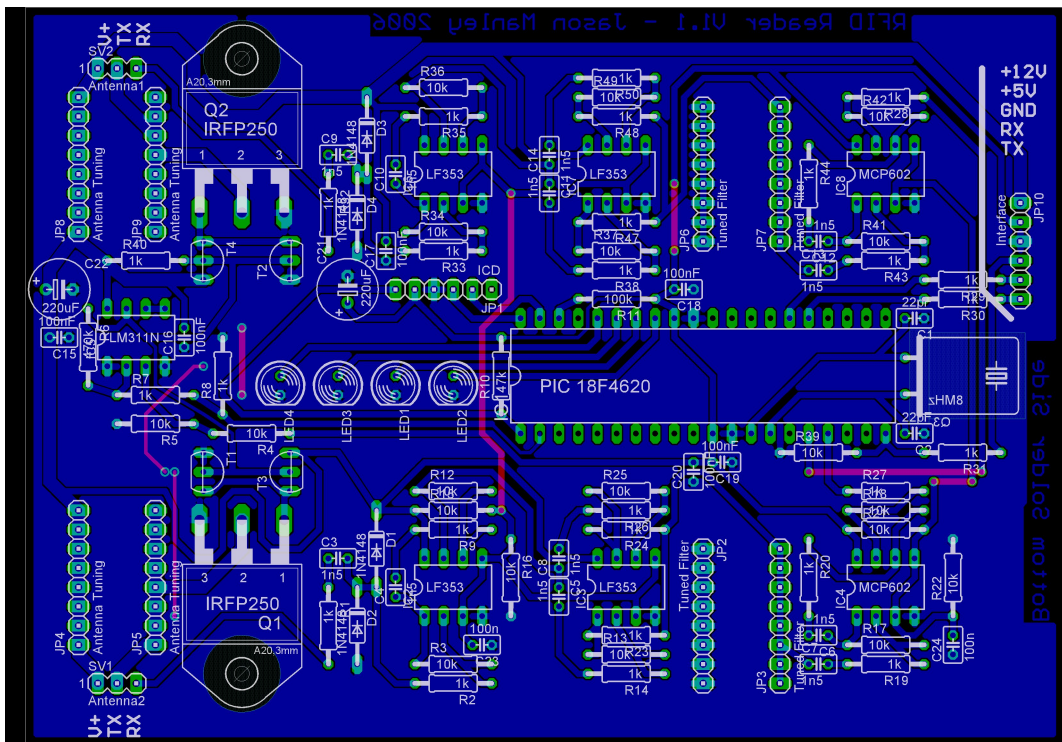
PCB Layout: single-ended output with dual channel receiver
